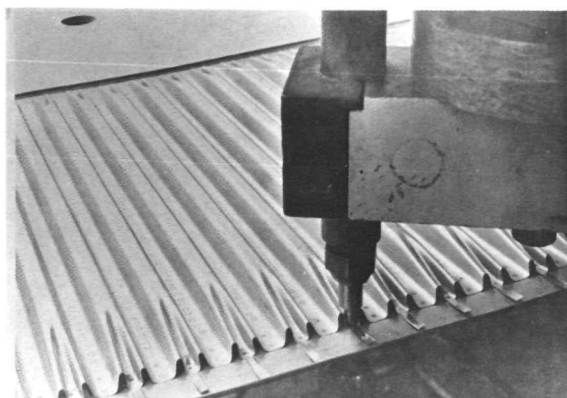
Spot-welding creased-edge corrugation to skin and doubler.
